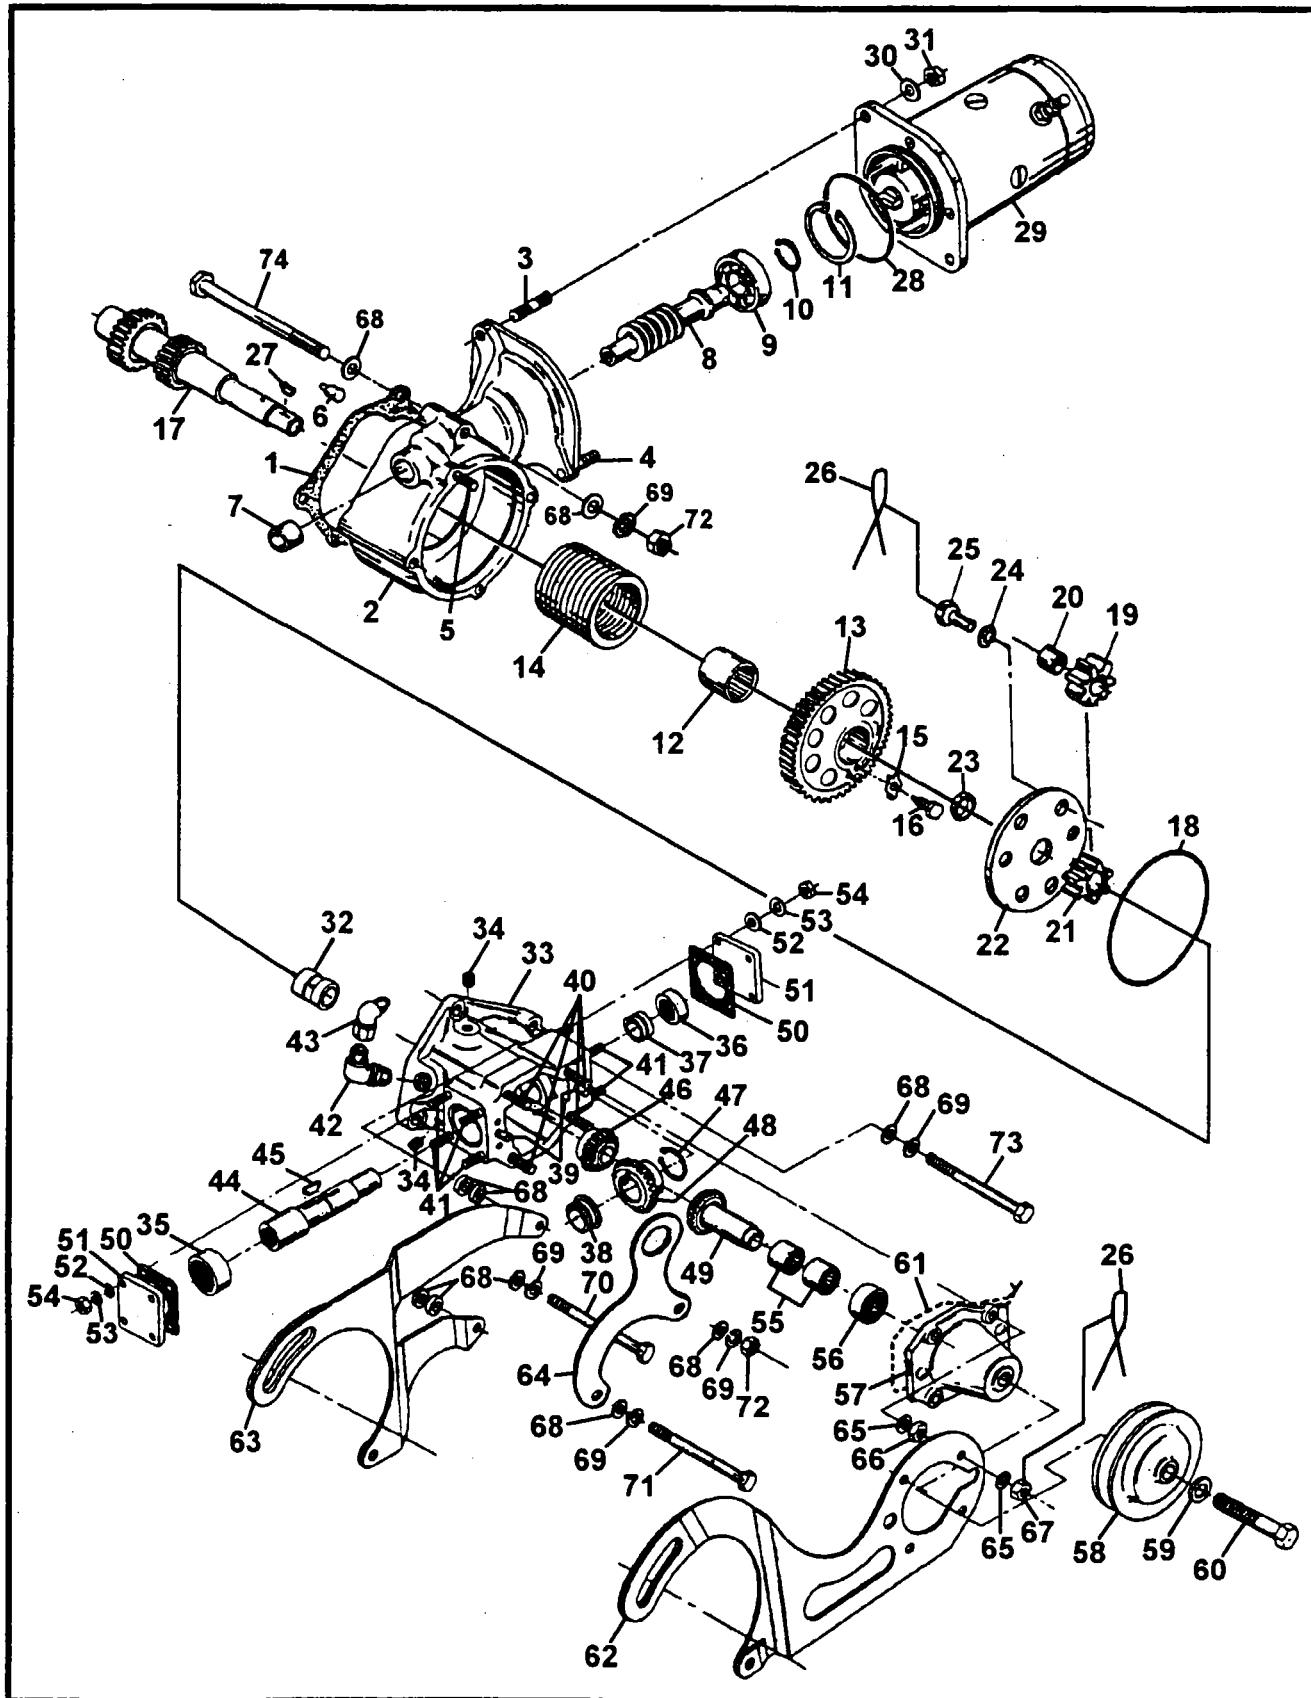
FREON COMPRESSOR, STARTER AND STARTER
